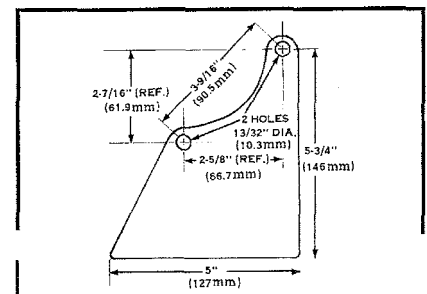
Simple drawing to assist in making a holding bracket to secure the trim and tilt assembly during service work.
